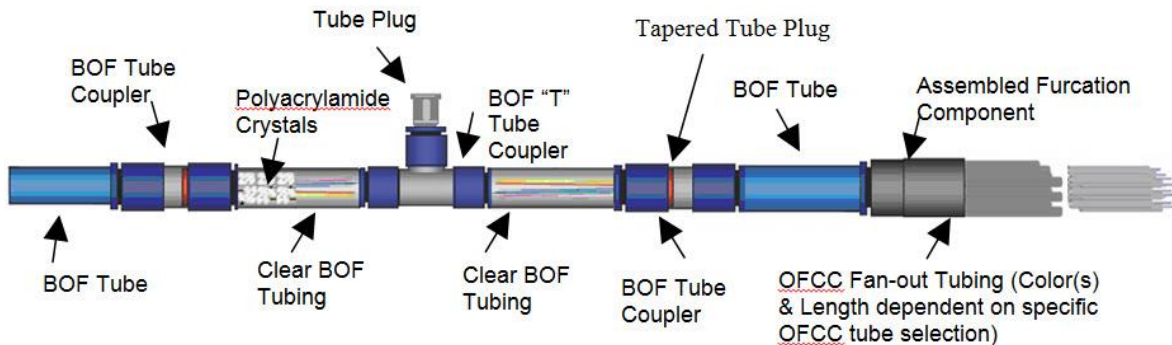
F3-12. Completed tee tube coupler furcation assembly with polyacrylamide crystals.
